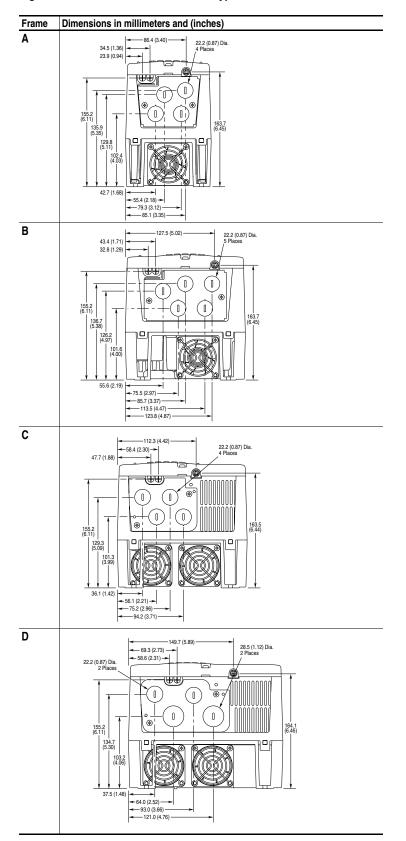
PowerFlex 70 IP20/NEMA Type 1 Bottom View Dimensions
